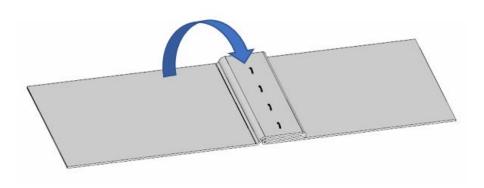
3D sketch showing the stitching of 2 tarpaulin sheets -2
